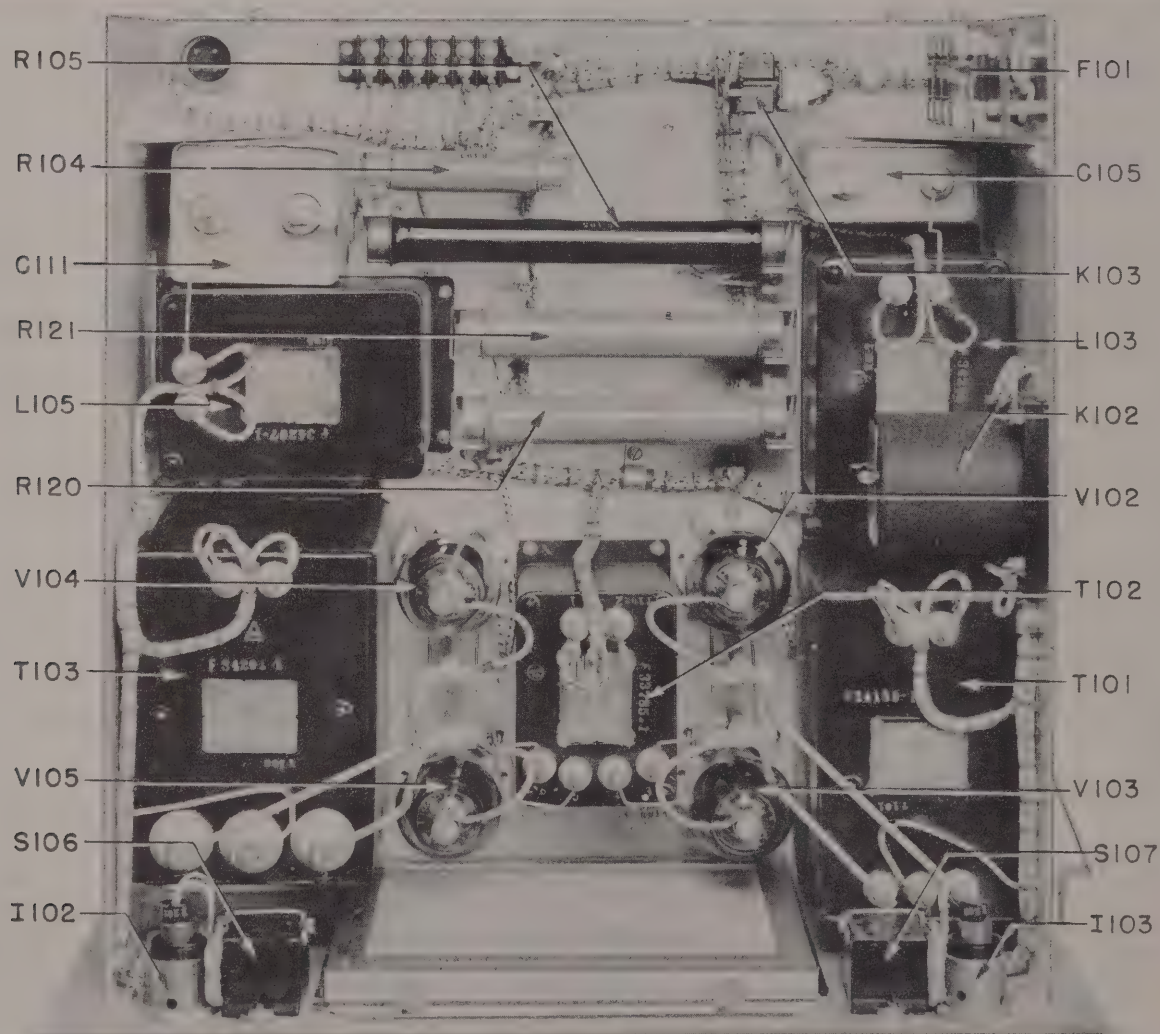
Radio Transmitter T-66/CRN-10—Top View of Power Supply Chassis
